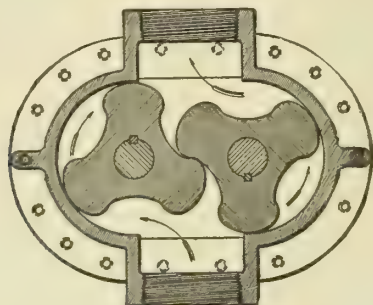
SECTION THROUGH IMPELLERS AND CASE
